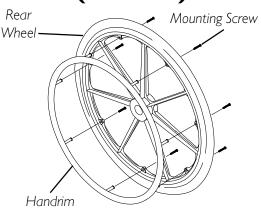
REPLACING REAR WHEEL HANDRIM
